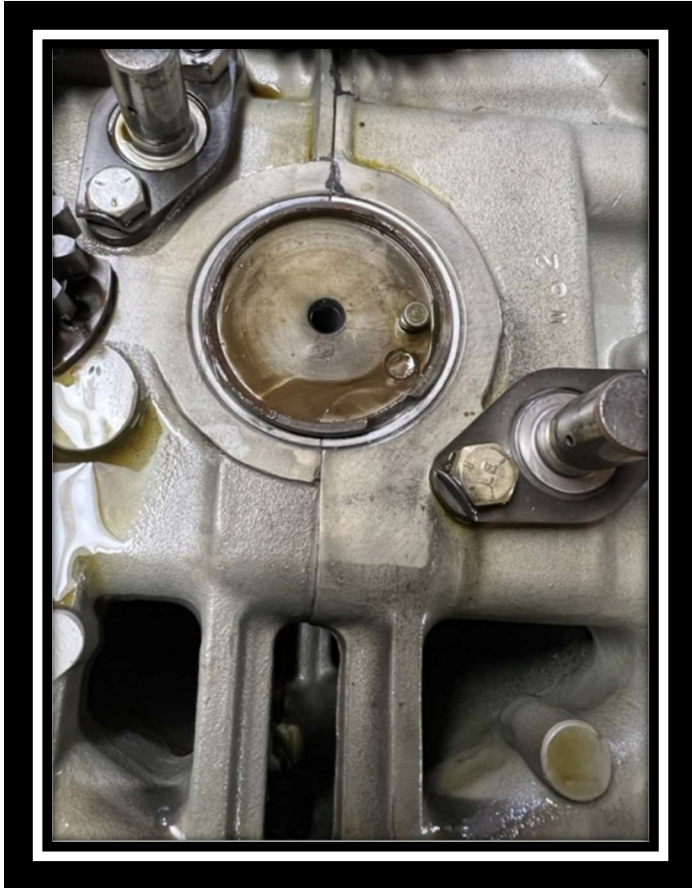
Crankshaft Gear Alignment Pin Sheared off.
